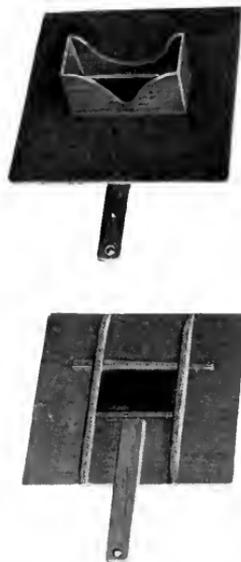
Front and Back Views of Welder's Hand Shield
